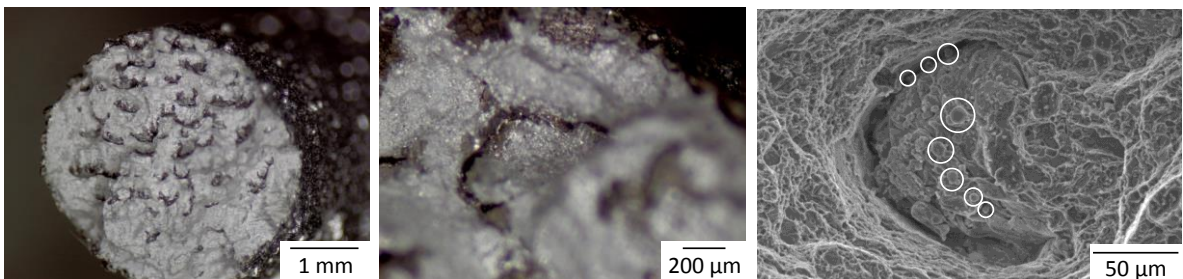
fracture surfaces of horizontal samples; left: as built, middle: T6, right: T6 in SEM
